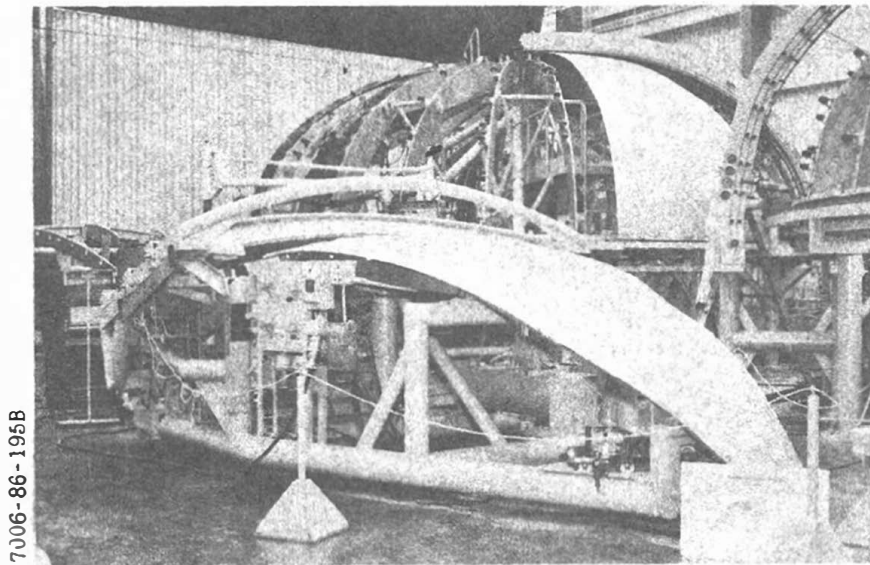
Thick-to-Thin Gore Segment Welder
